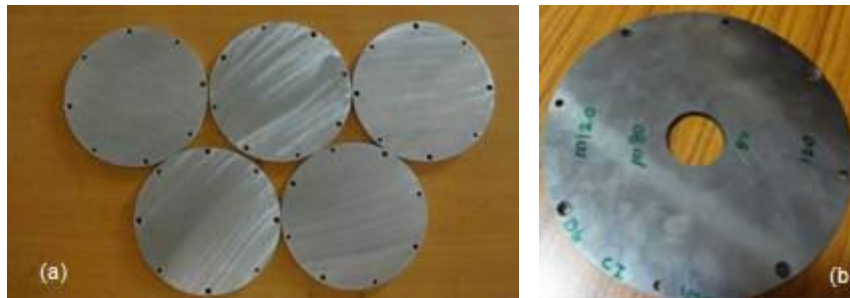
Machined discs: (a) of A356-MWCNT composite, (b) of gray cast iron
